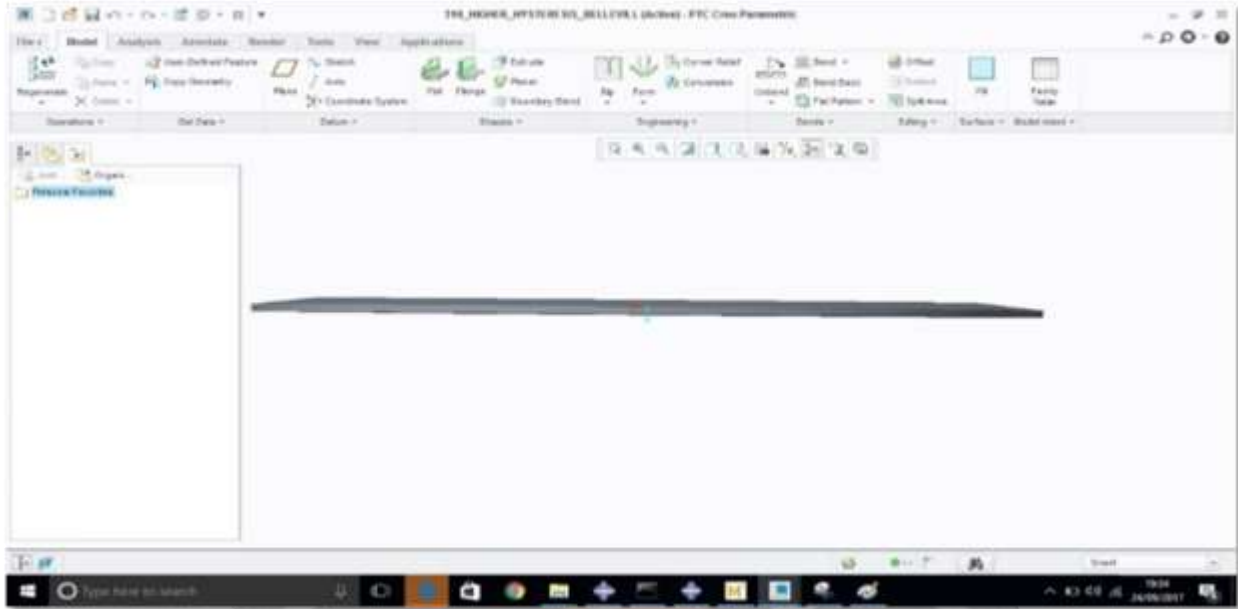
3D Model of Cupped Spring Washer (Front View)
